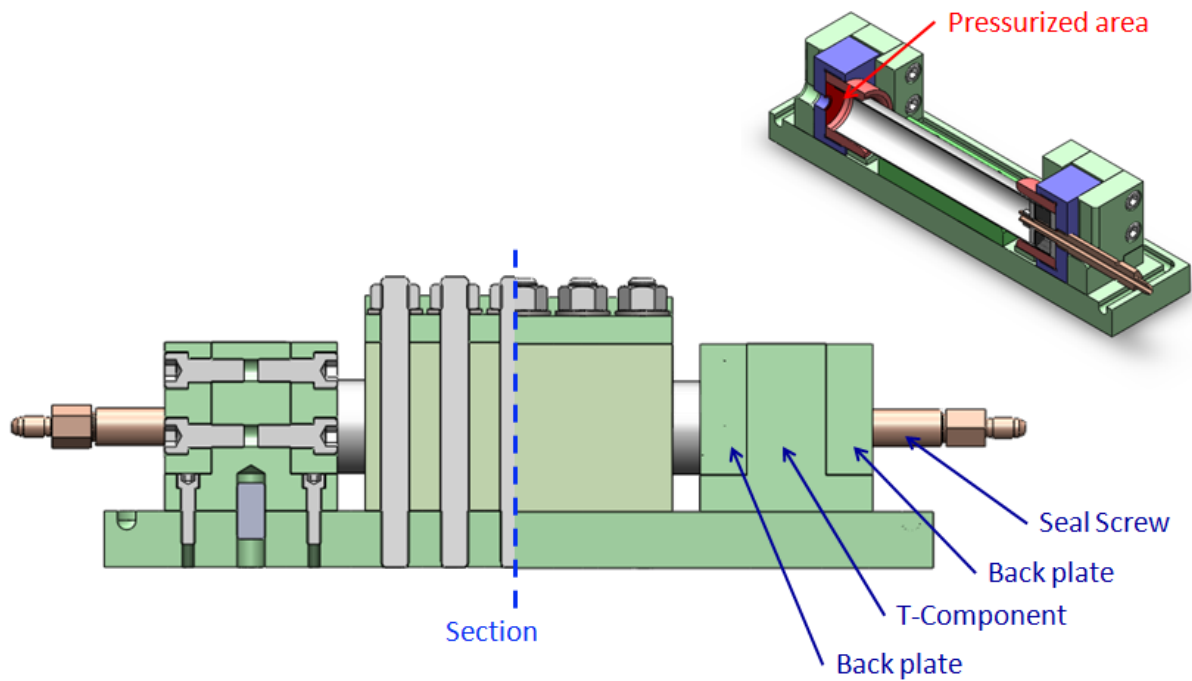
Cross-section of the sealing mechanism inside the end-block.
